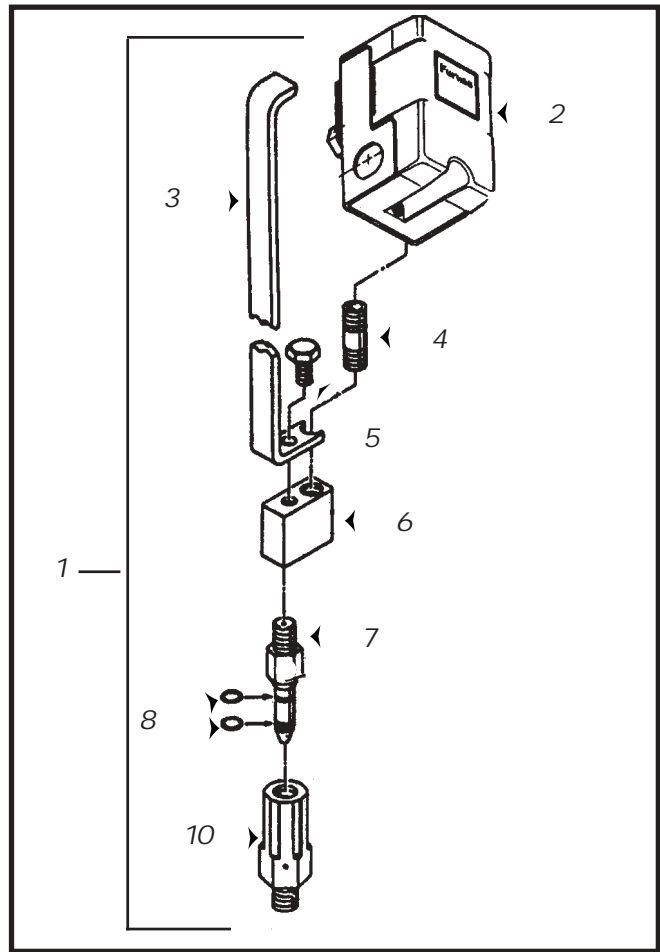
EXPLODED VIEW OF 0AWSP CONTROL KIT
